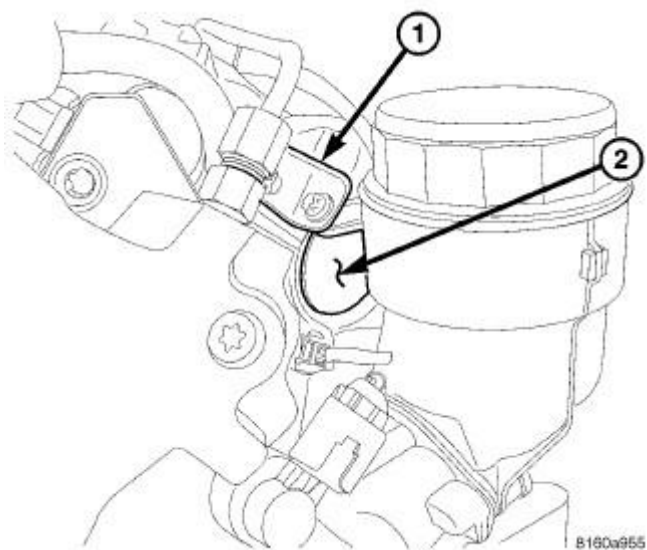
LEFT FRONT CAMSHAFT SEAL WITH OIL FILTER HOUSING BRACKET
